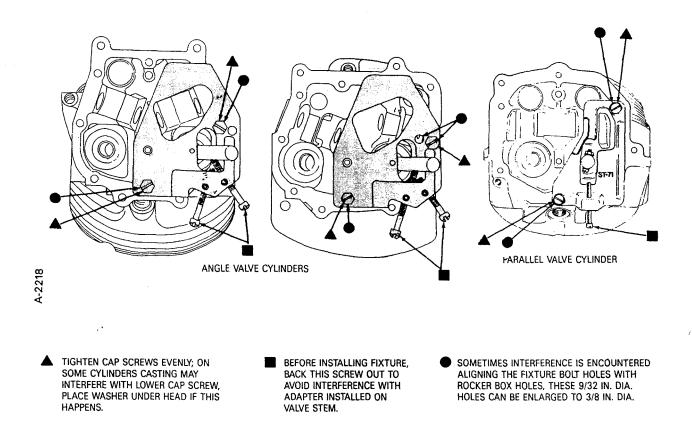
Compressor Plate Installed on Cylinder - Angle and Parallel Valve Cylinders
